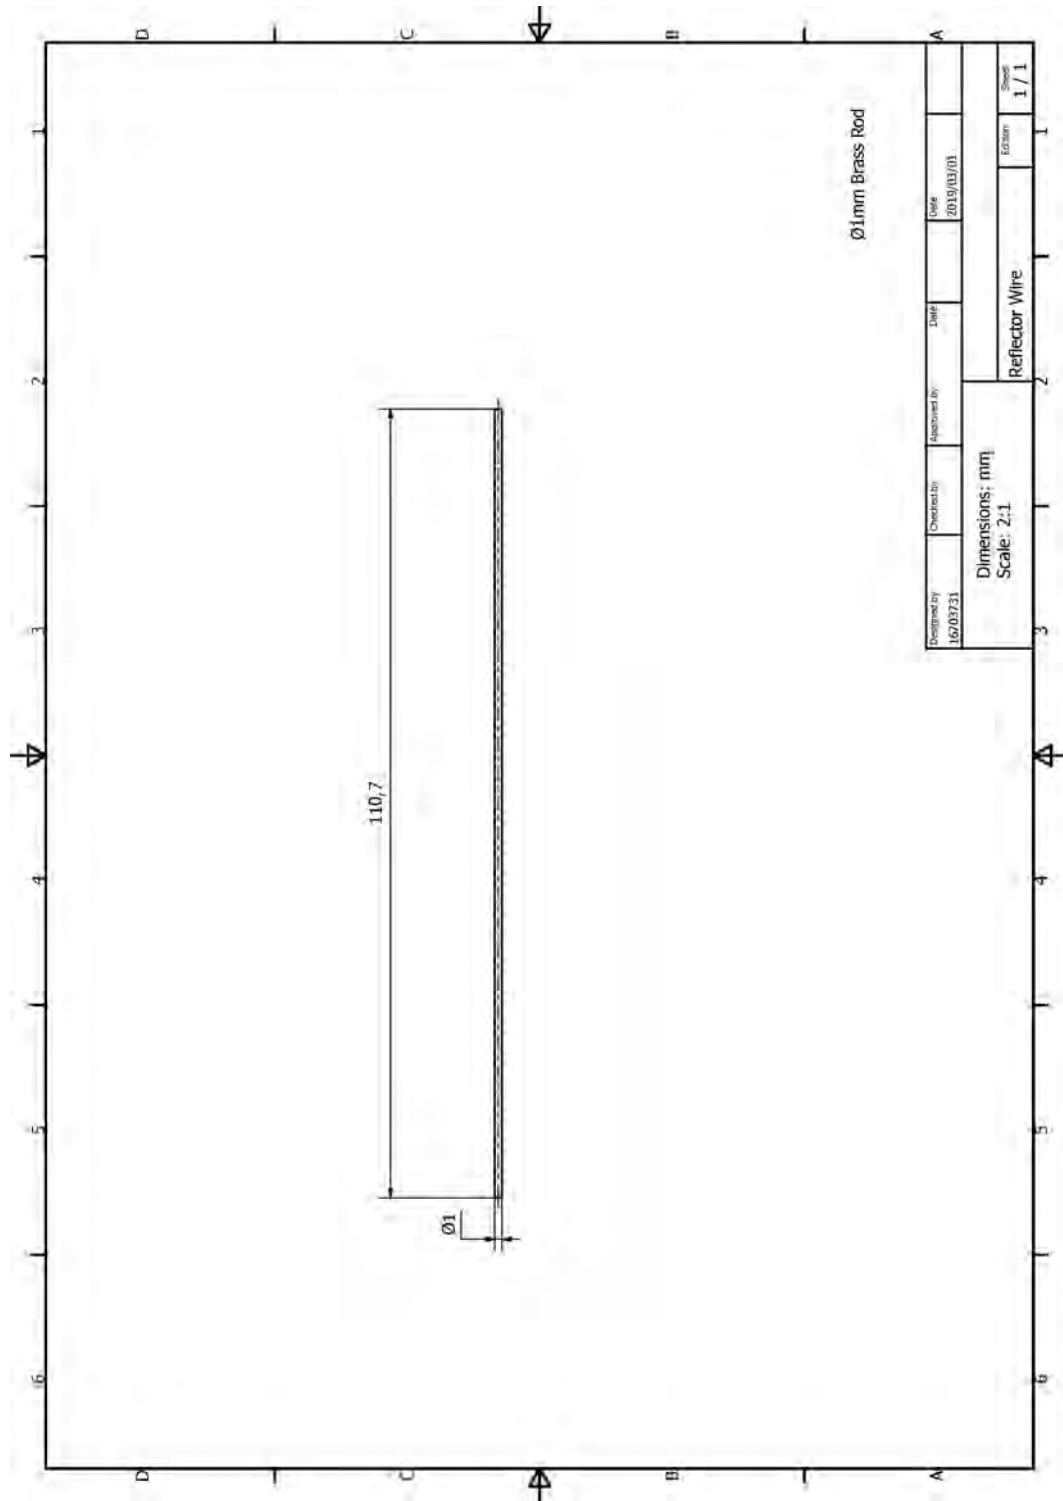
1:100 scale single element model brass reflector wire engineering drawing. This engineering drawing shows the Ø1 mm brass rods used for the half reflector in the 1:100 scale single element model.
